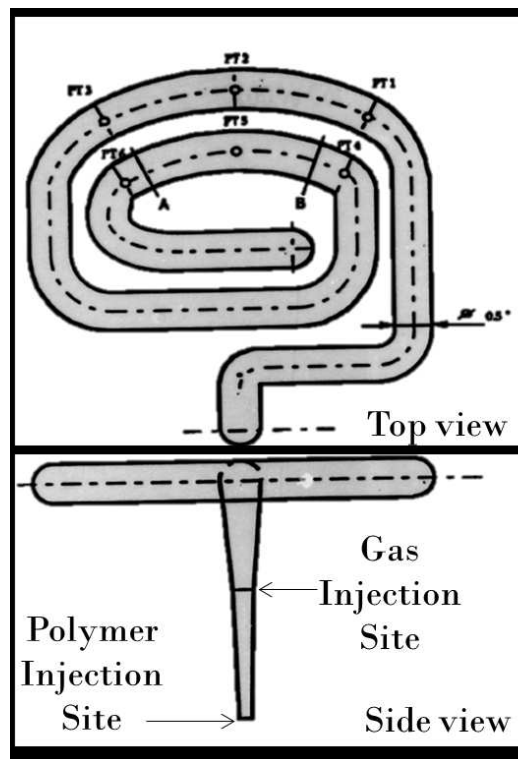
Spiral Mold Geometry Used in Gas-Assisted Injection Molding Trials.
